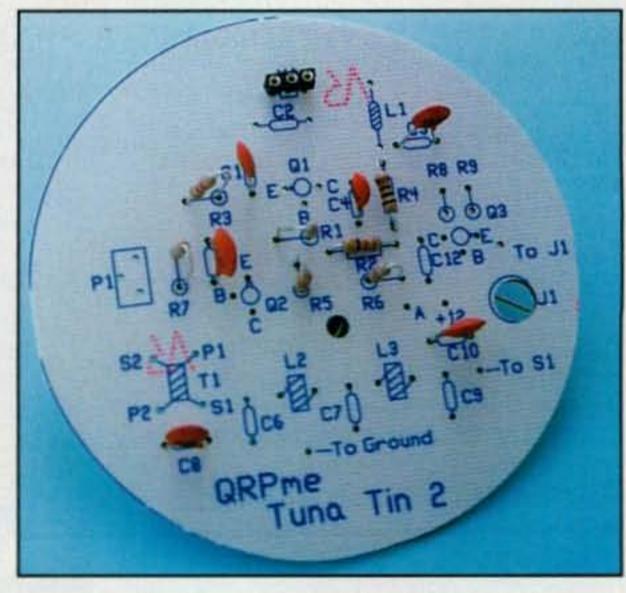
Assembly of the Tuna Tin 2 gets under way. The board is roomy and well marked, making assembly rather easy. It is an ultimate compliment to original designer and QRPer extraordinaire Doug DeMaw, W1FB. Nice!
